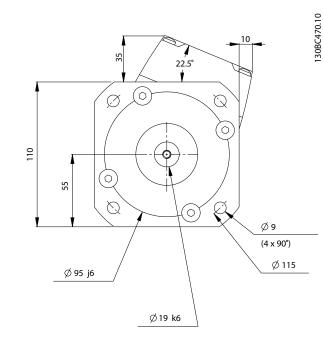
Front View: Servomotor with IEC Flange and Brake
